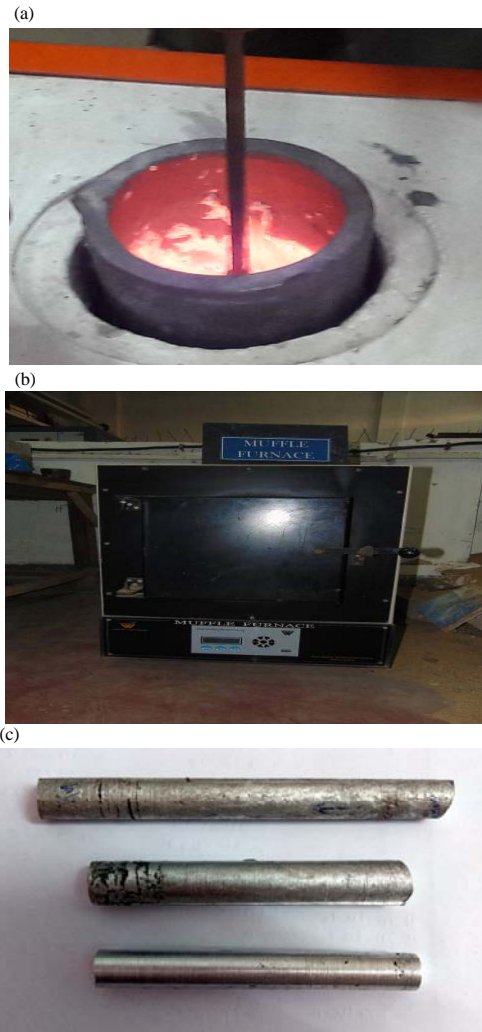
a) Stir Casting Setup; b) muffle furnace and c) As cast specimen
